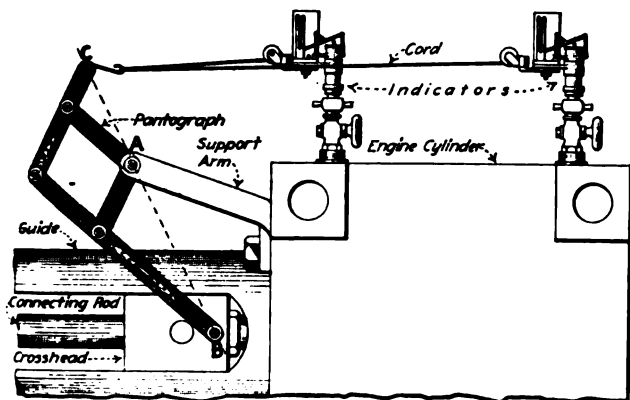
Simple pantograph for indicator-reducing purposes.
